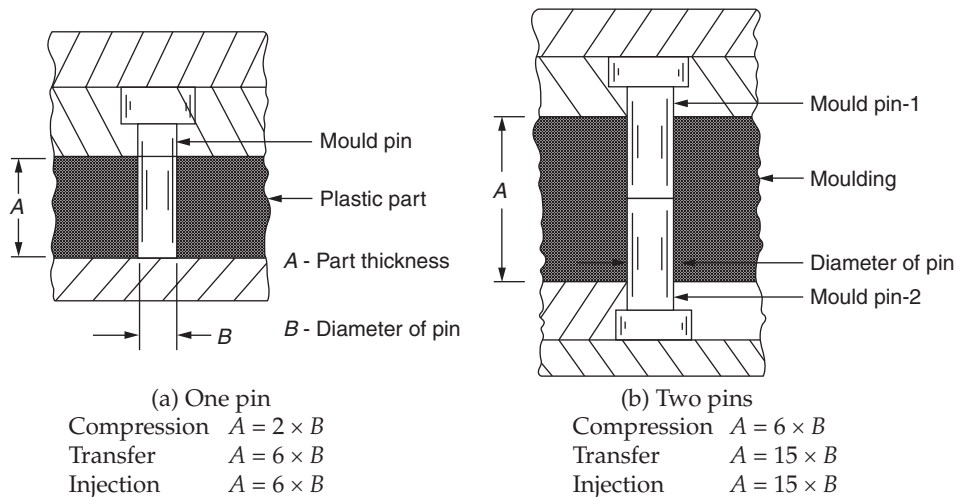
Moulded hole made by pin supported only at one end.
